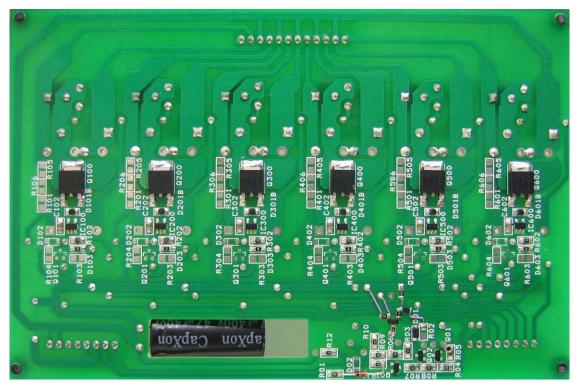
CrM Buck LED Driver Board (Bottom Side)
